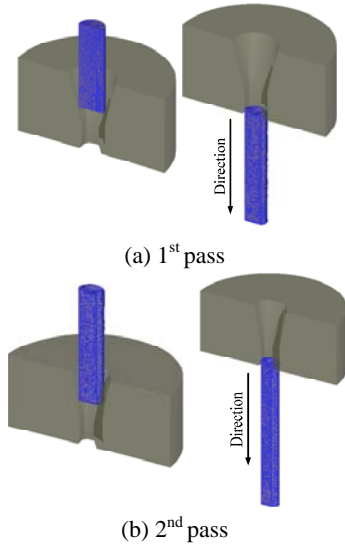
FE-analysis of the shape drawing process for cross roller guide
